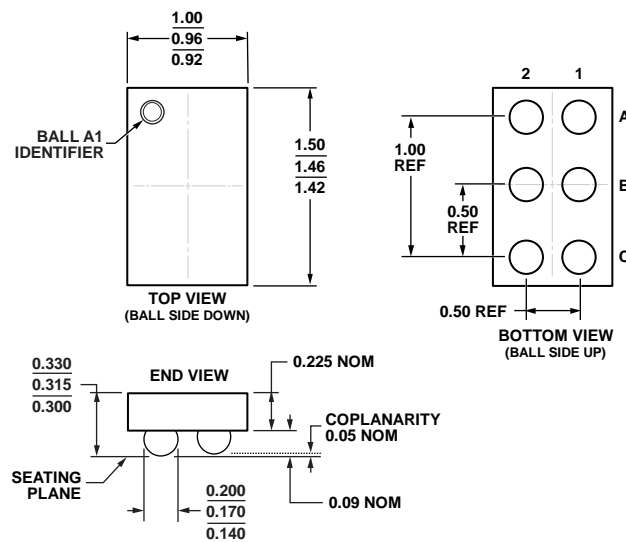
6-Ball Bumped Bare Die Sales [BUMPED_CHIP]
